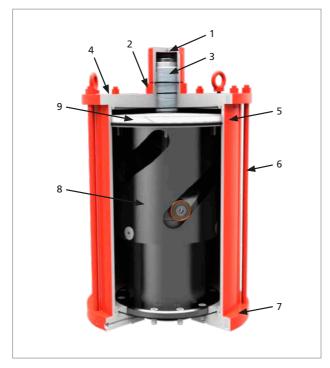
Pneumatic compact double effect actuator – Type A: external tie rods part description
